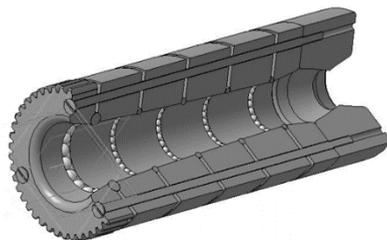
A-A view of the construction of the device for stretching non-ferrous metal wires in a cylindrical shape with the help of balls; 3-standard balls, 6-fastening screws
